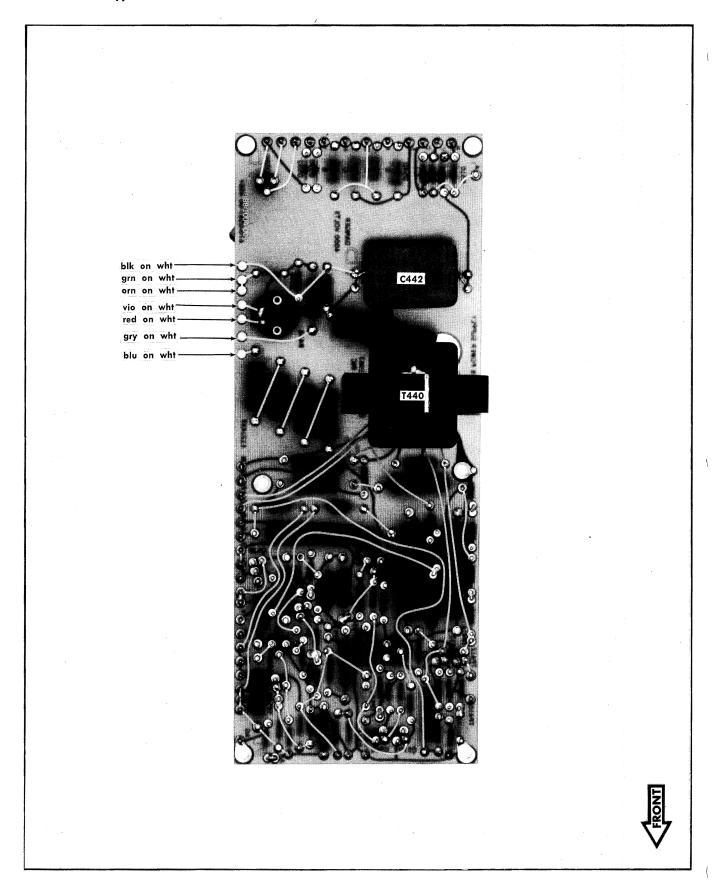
Bottom view of Power board showing components and wire color codes.
